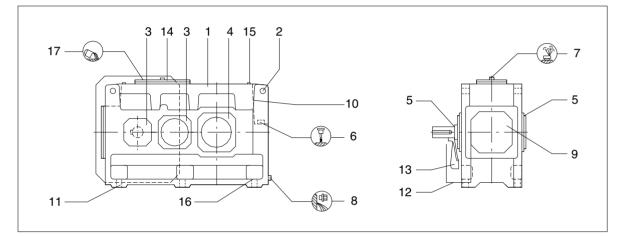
Gear-unit features on gear units type $H..H \ge 13$
